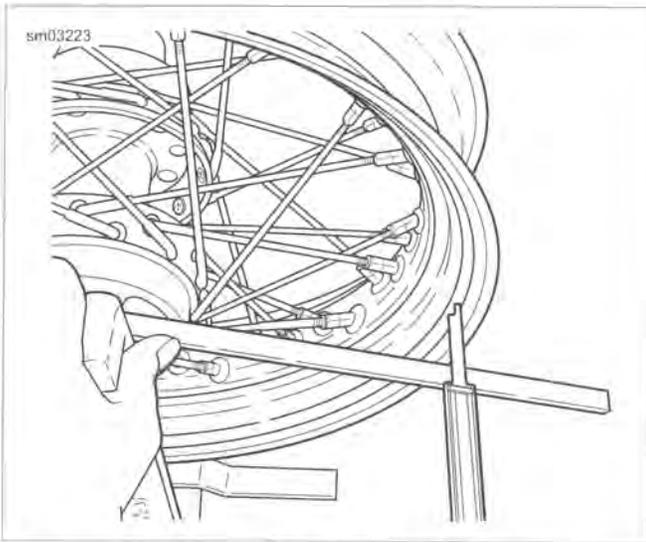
Checking Wheel Hub Offset Dimension (typical)
